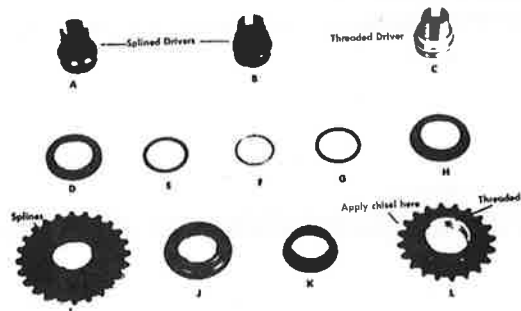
Parts line up merely to show splined parts against threaded or screwed parts (drivers and sprockets).
